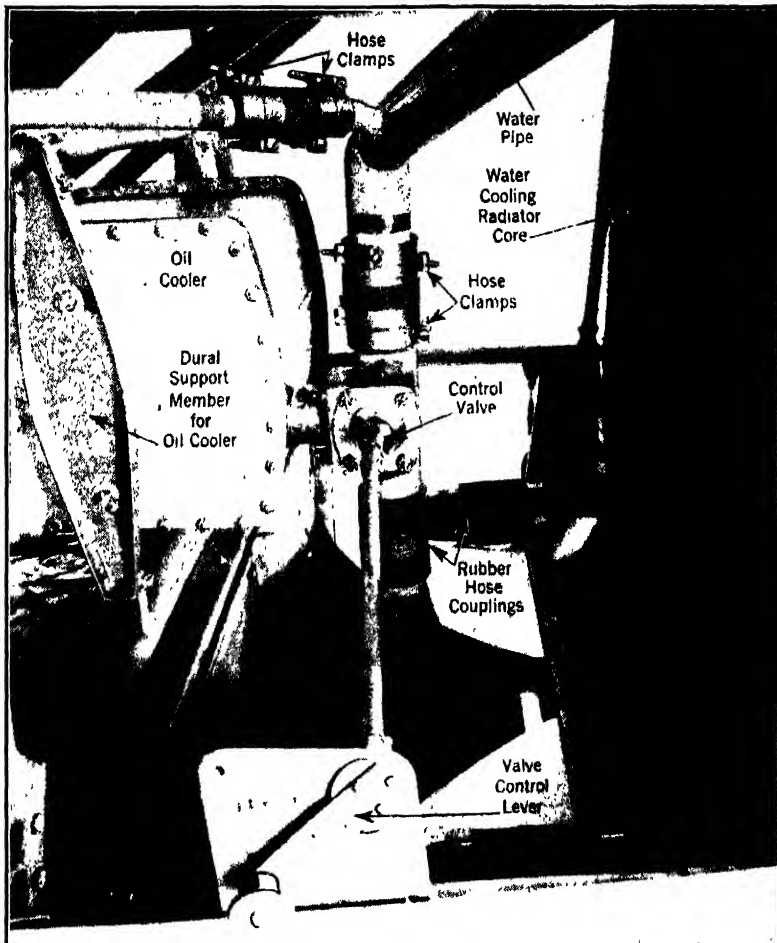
Wright Oil Cooler and Manual Control Valve as Installed in Airplane.
